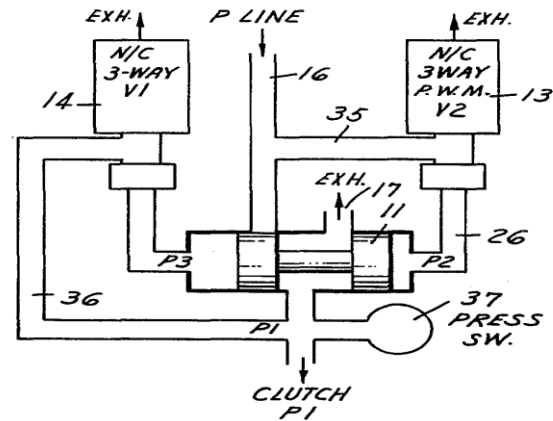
longitudinal sectional view of an electro-hydraulic valve system.
